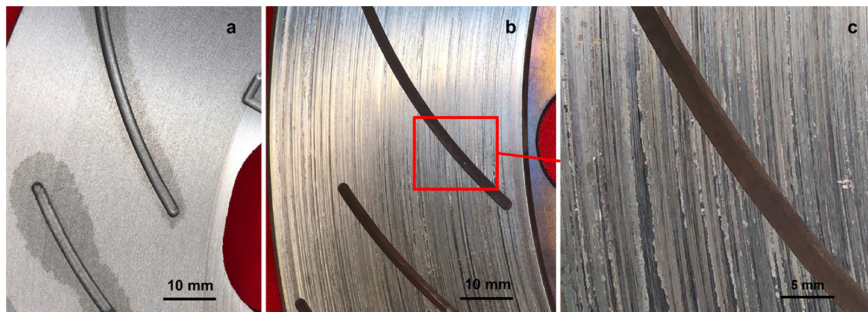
Photographs of (a) a new brake disc, (b) a used brake disc after 38 laps (168 km), and (c) a detail of abrasive wear on the used brake disc.
